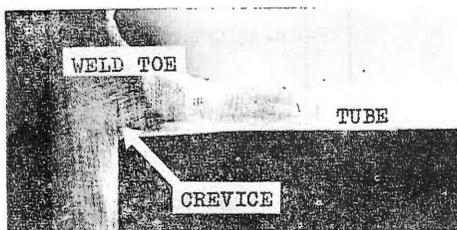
Details of the Transverse Section of the Weld Toe
